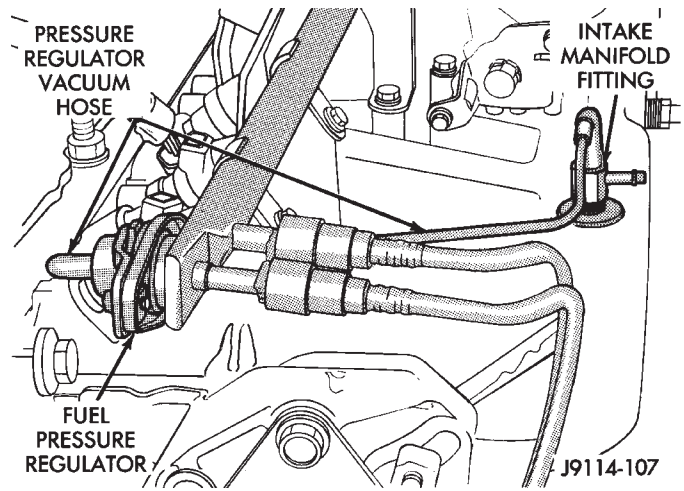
Fuel Pressure Regulator—4.0L Engine—Typical
